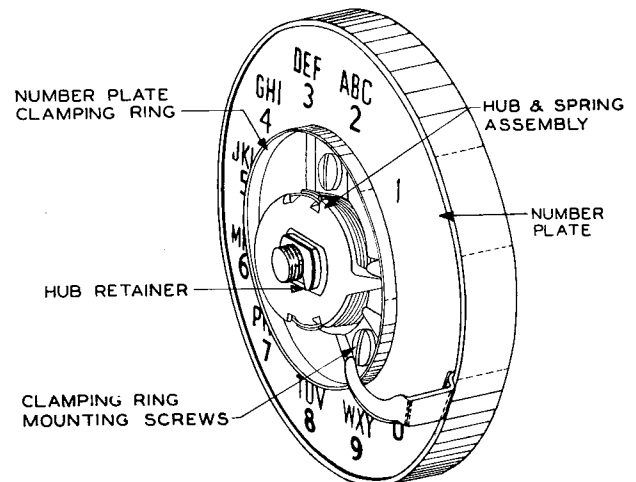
Illustrating the Hub Retainer and the Clamping Ring on 6-type Dials
